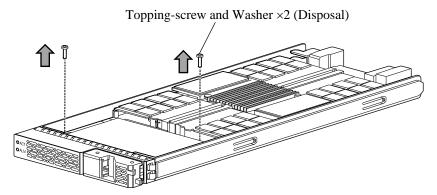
D Removing Tapping-screws and Washers
